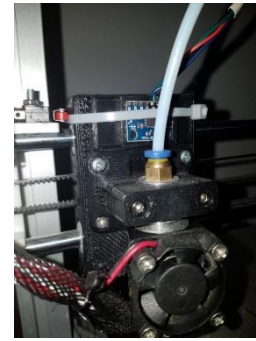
Sensor installed on the carriage, measurements of acceleration in X axis
